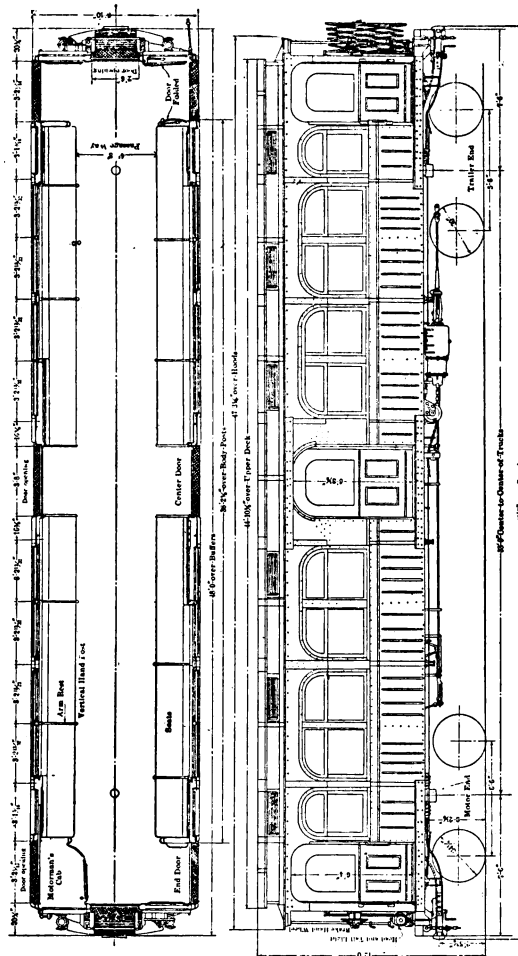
Car of the Hudson and Manhattan Railroad ("McAdoo Tunnel Lines") with End and Center Side Doors. Plan and Elevation.
